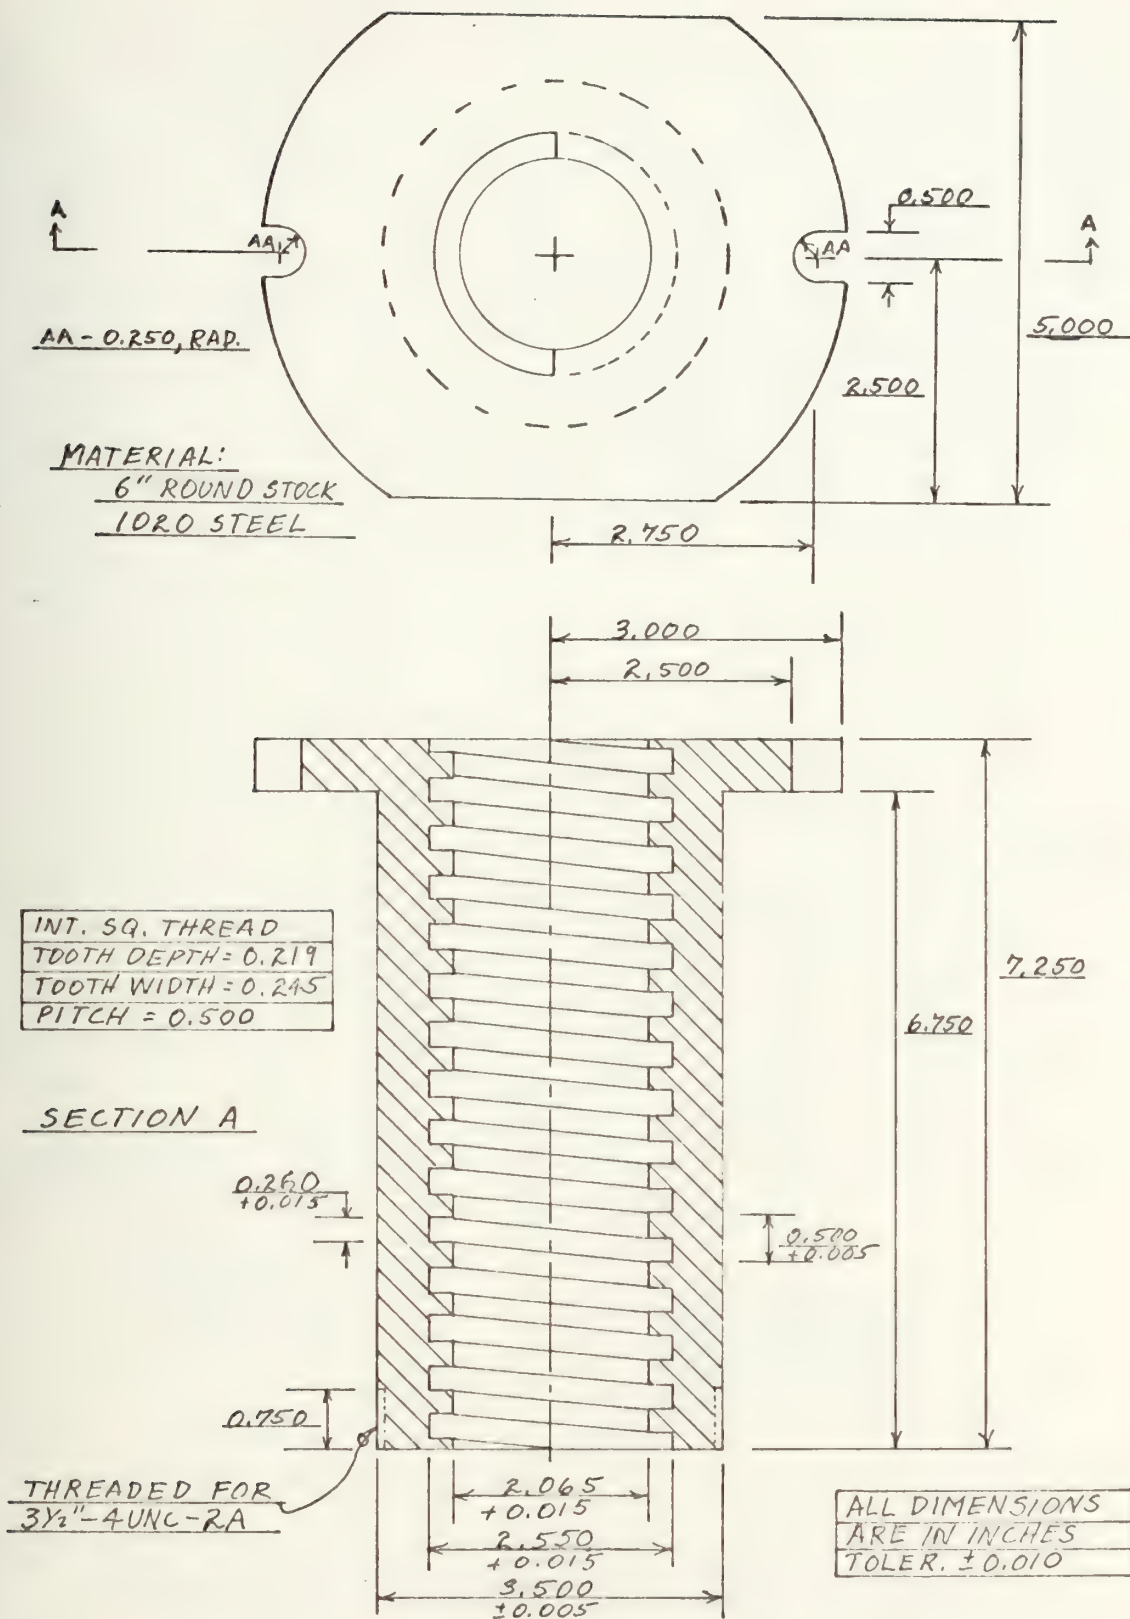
PIECE I-3-2, DRIVE CORE
